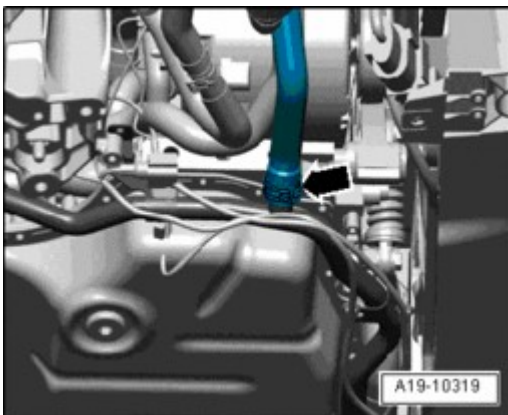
Removing Coolant Hose From Front Lower Coolant Pipe
